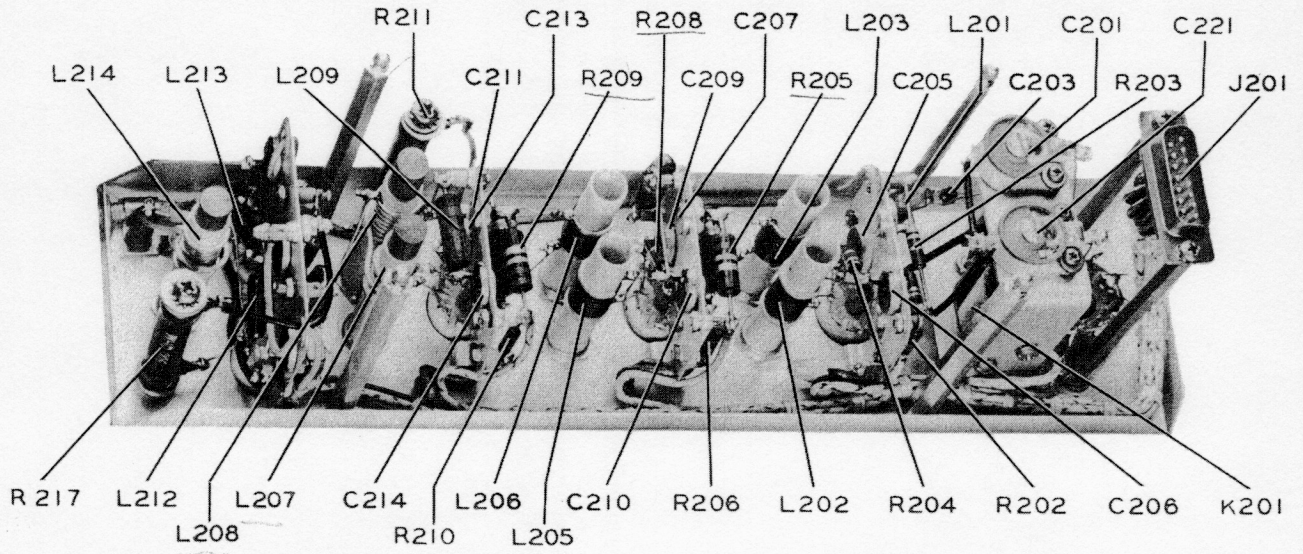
A. Type 242F-2 R-F Driver Subchassis, Rear View, Shield Removed
